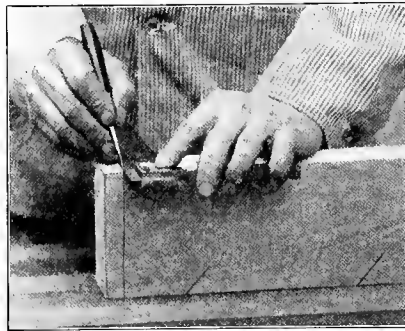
Knife and Square in Position for Drawing Line on Edge
